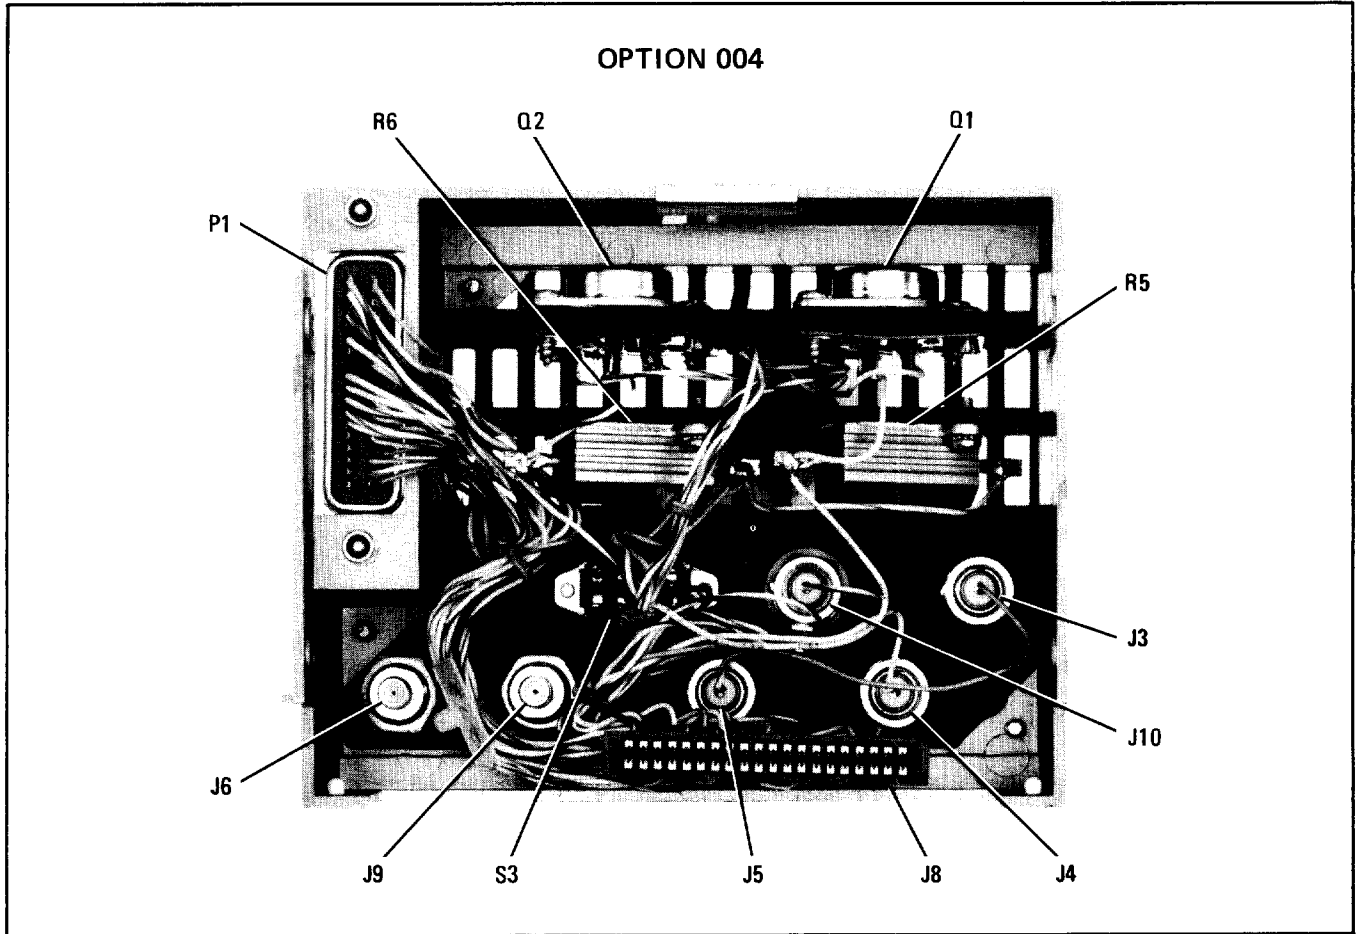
Rear Panel Component Location Opt. 004 (CHANGE F)
